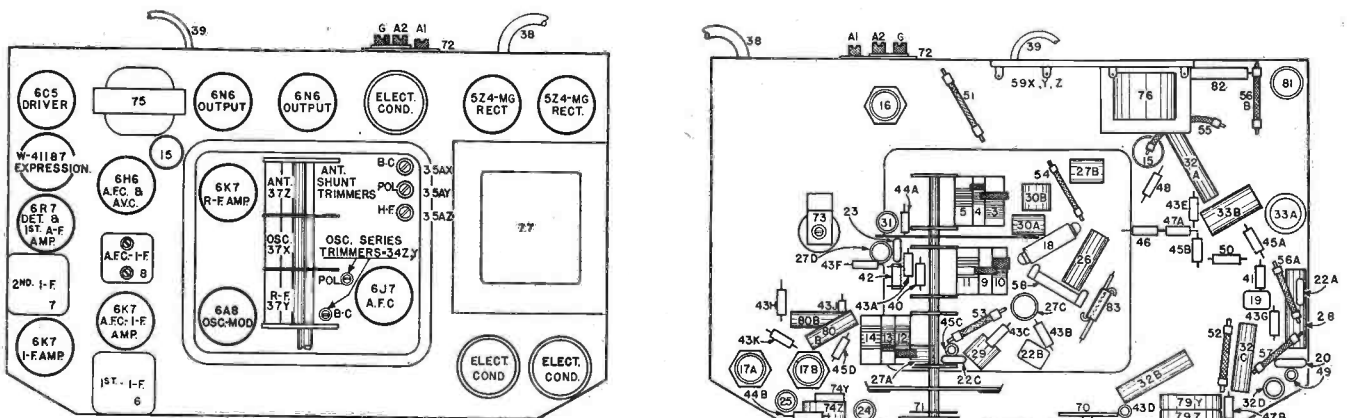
Crosley 1316 chassis views showing tube and trimmer locations.
